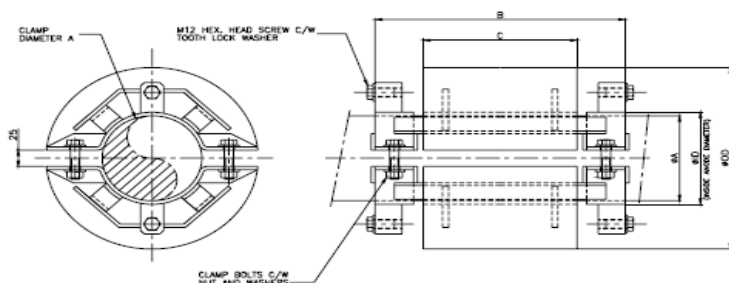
"Bracelet Anode Typical Drawing". Source: Design Basis, Doc No. M40109 (2013) 3.7.2.2 Weight and Dimension Tolerances
